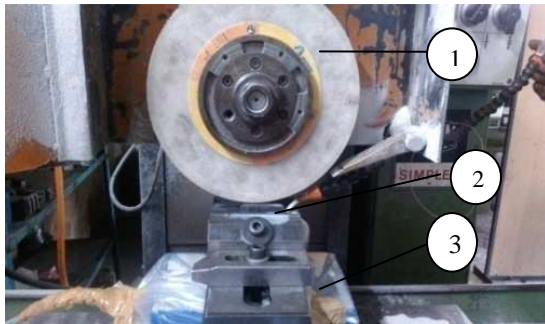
Grinding machine setup: 1 – grinding wheel, 2 – workpiece, 3 – dynamometer.
